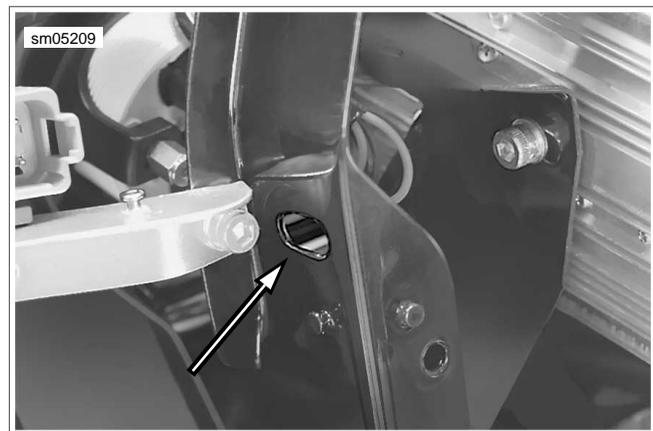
Cable Strap Conduit to Fairing Bracket (Right Side)
